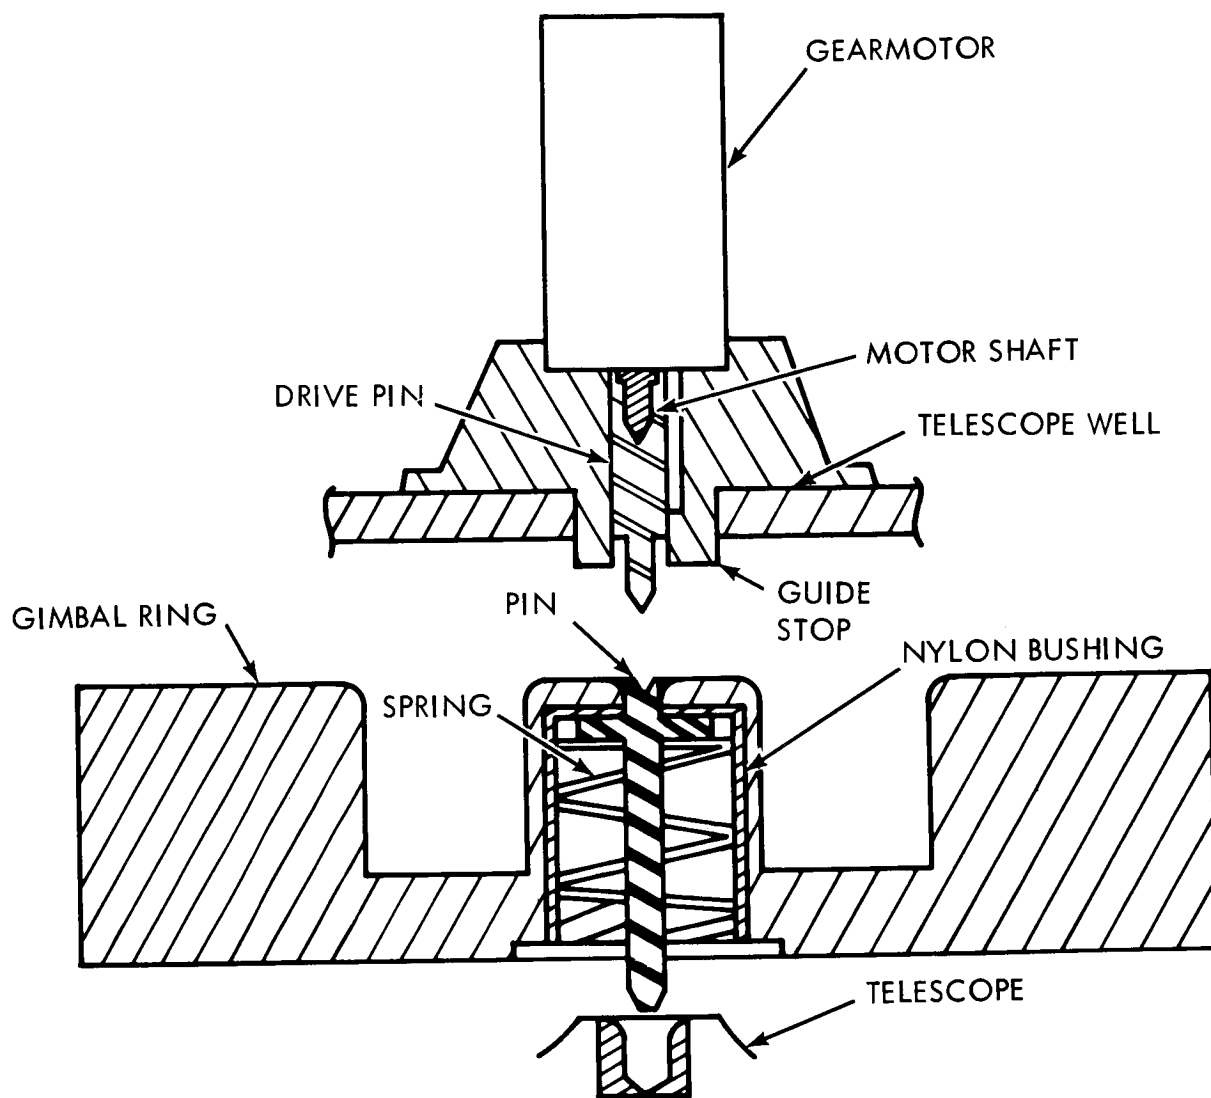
Telescope Caging Mechanism
